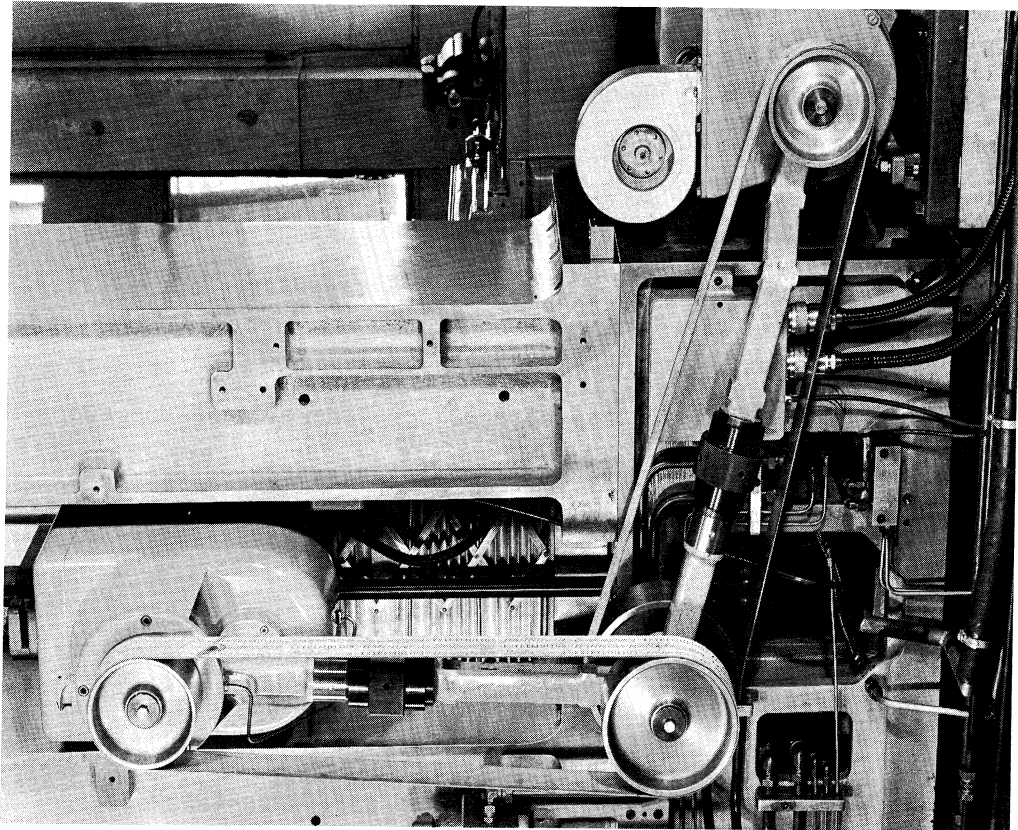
Belt Drive of DIXI 3S Jig Boring Machine. The two pulleys are kept apart by adjustable pressure rods. Speed ranges can be altered by changing two pulleys.
